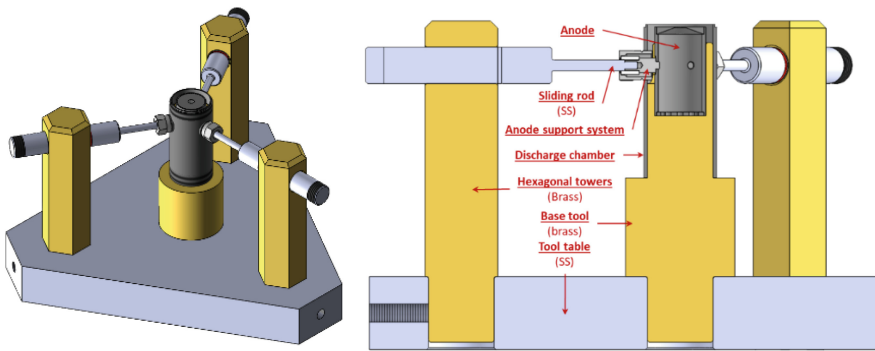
The assembly tool designed to improve the anode mounting procedure. The main component that directly affects the anode grid position is the *base tool
